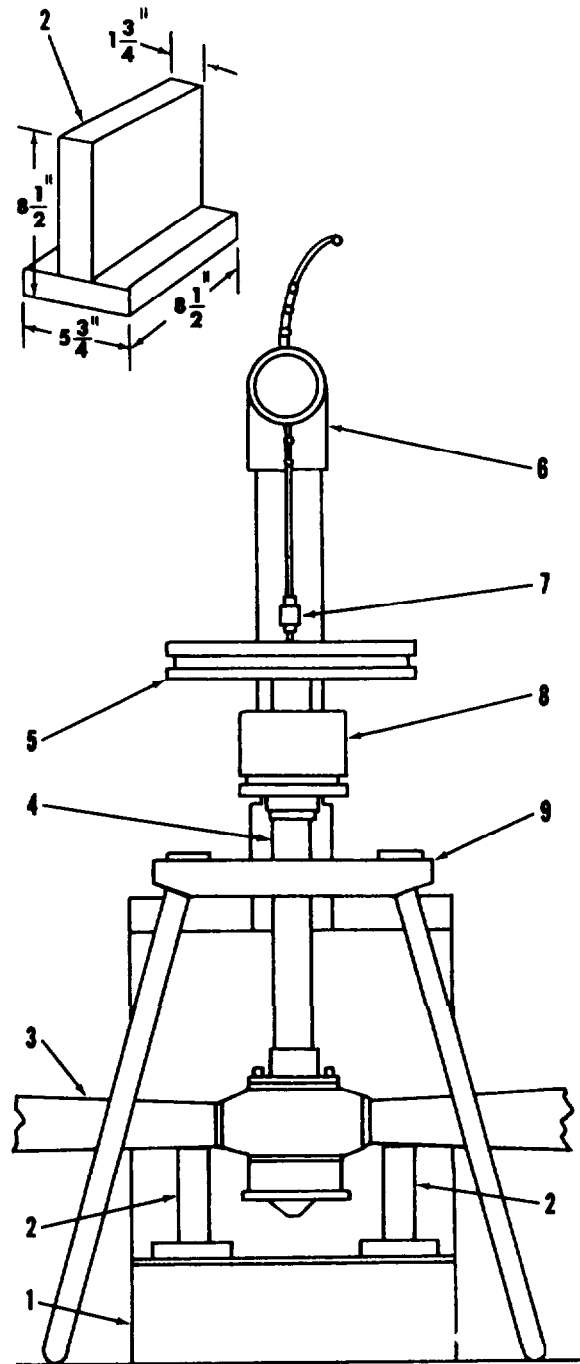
Typical Support Arrangement - underslung Suspended Propeller Assembly.
